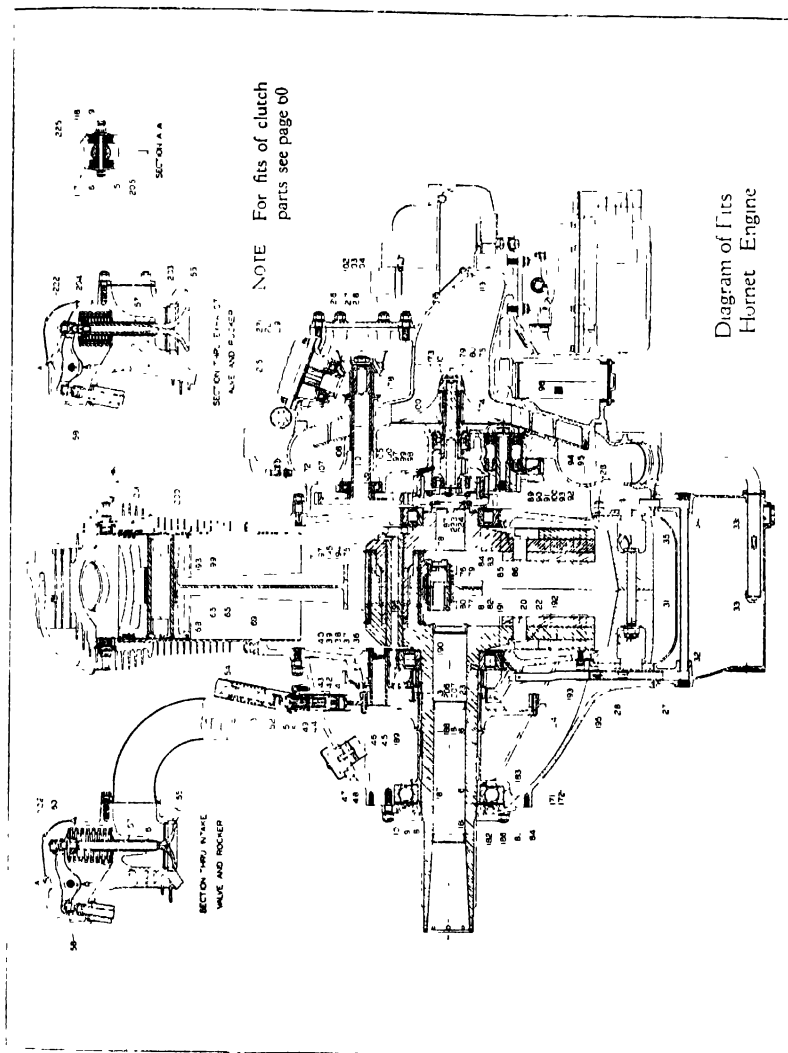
Numbered Key Diagram to Accompany Table of Fits for "Hornet" Engine. This Sectional View also Shows Construction of Engine.
